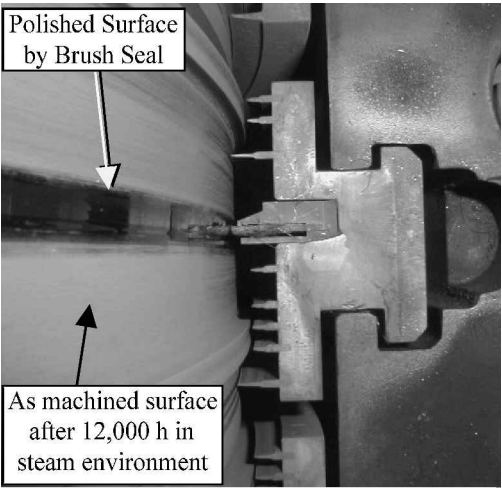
Typical rotor surface finish under a steam-turbine end packing brush seal.
